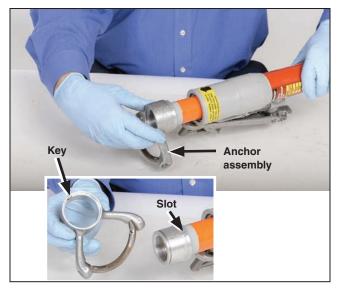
Install the anchor assembly so the key mates with the slot on the inner tube assembly.
